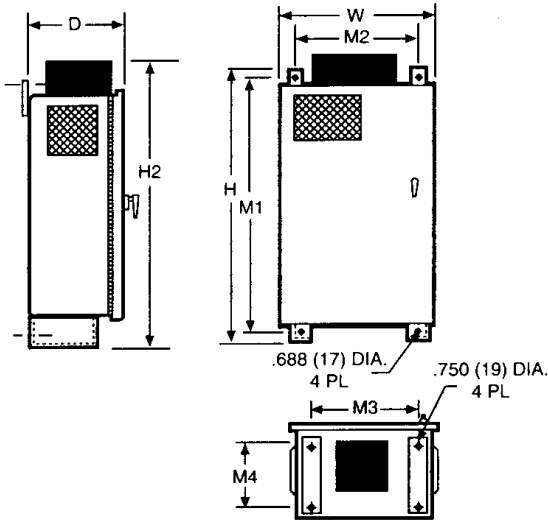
NEMA TYPE 1 VENTILATED ENCLOSURE, W8
